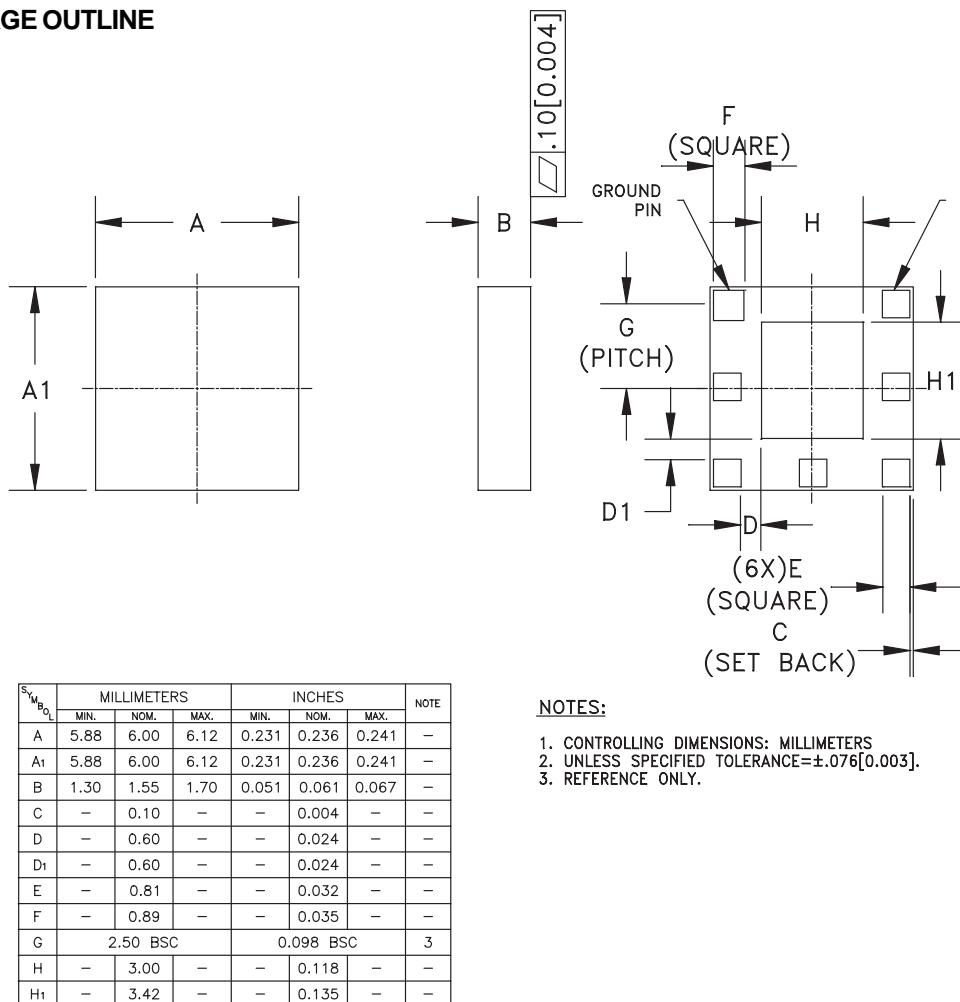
M5 Package Outline - 7 Pin 6mm x 6mm Surface Mount Module (High Band)
